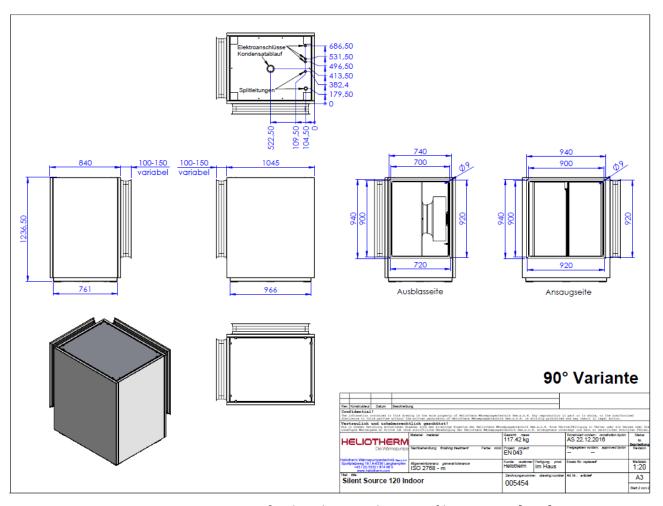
Dimensions of indoor heat exchanger of heat pump [mm]
